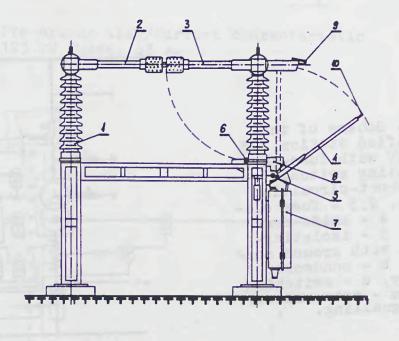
123 fuse short circuiting switch. 1 - standinsulator, 2 - immovable fuse element, 3 - rotationally mounted fuse element, 4 - short-circuiting switch knifecontact, 5 - drive-shaft, 6 - lock release device, 7,8 casings, 9 - immovable contact, 10 - arcing contact.
